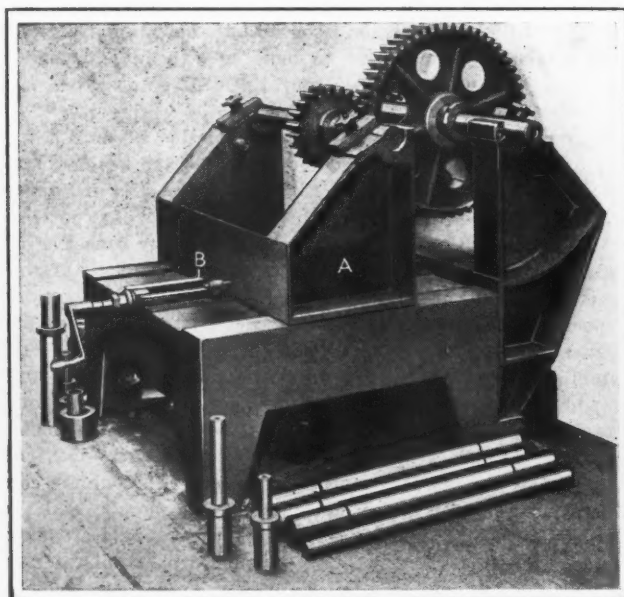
Fixture set up with Two Experimental Spur Gears at the Correct Center Distance
